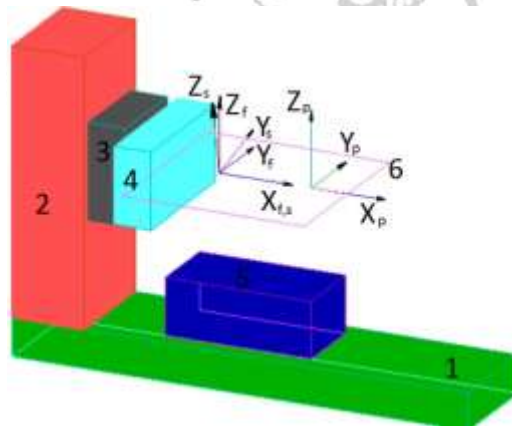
Cylindrical gear milling machine structure with coordinate systems.
